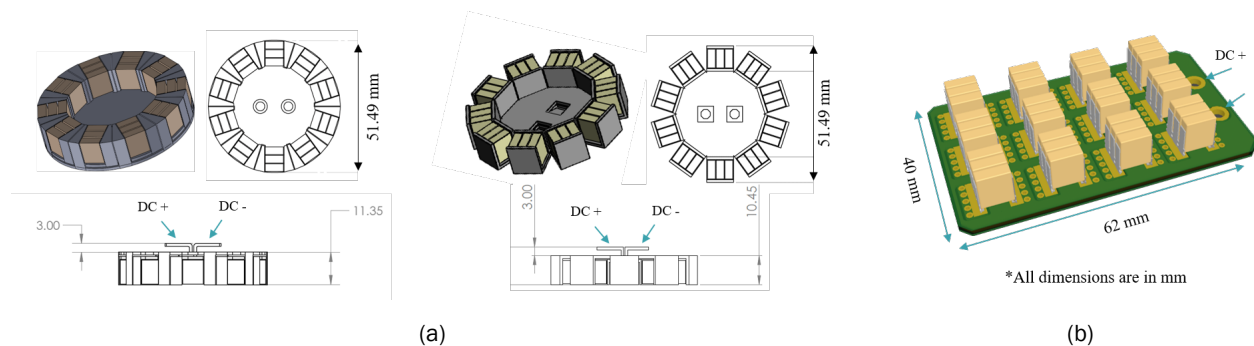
Designed capacitor packaging: (a) proposed circular package and (b) a traditional flat capacitor package.
